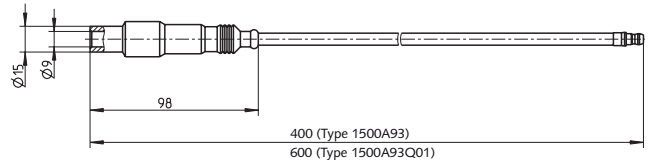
Spark plug extension cable Types 1500A93 (L = 400 mm) and 1500A93Q01 (L = 600 mm)
